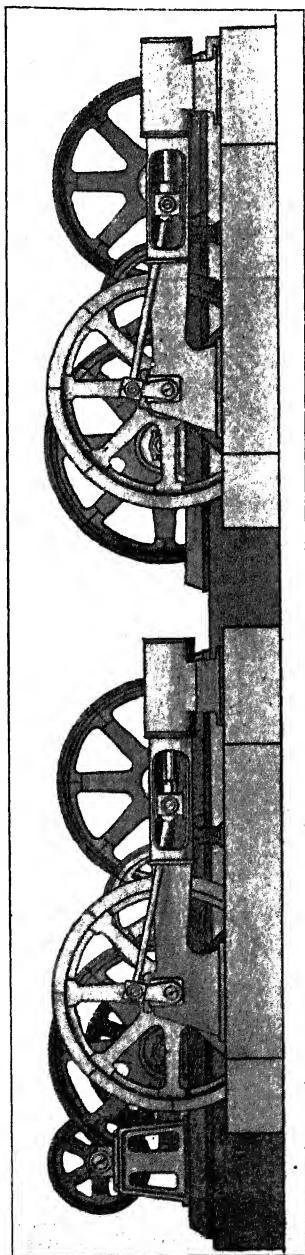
Side-elevation of two engines and sets of gearing, as arranged, for driving a fourteen-roller installation.
